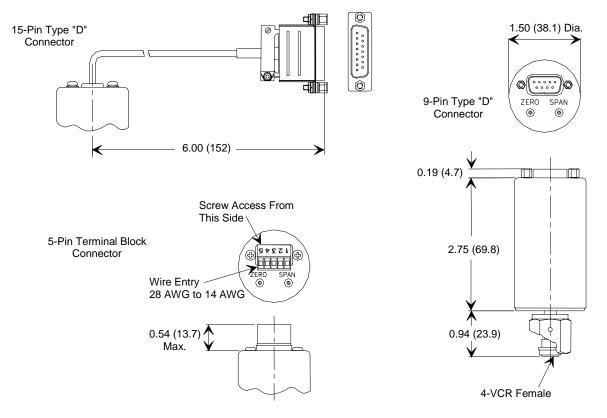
Dimensions of the Low Pressure (up to 1000 Torr) Type 722B Transducer
